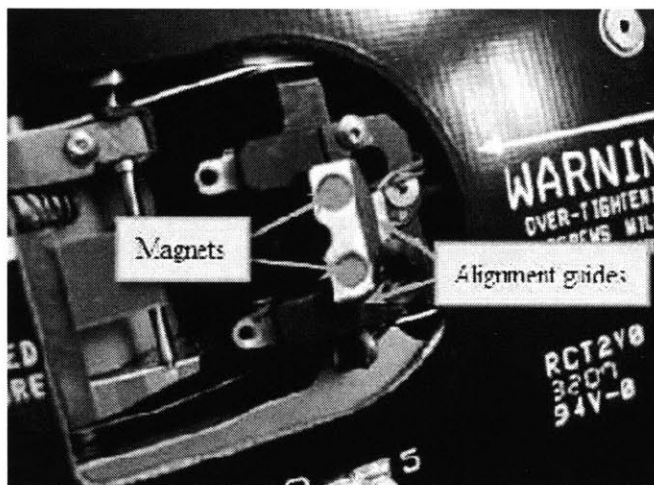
DPN 5000 universal mount magnets and alignment guides for mounting the tip
